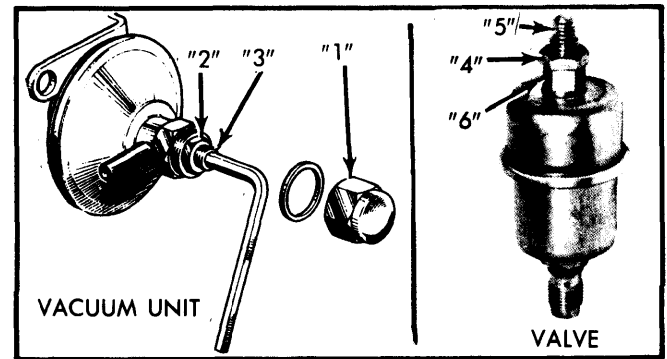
Adjusting Fast Idle at Deceleration Vacuum Unit
